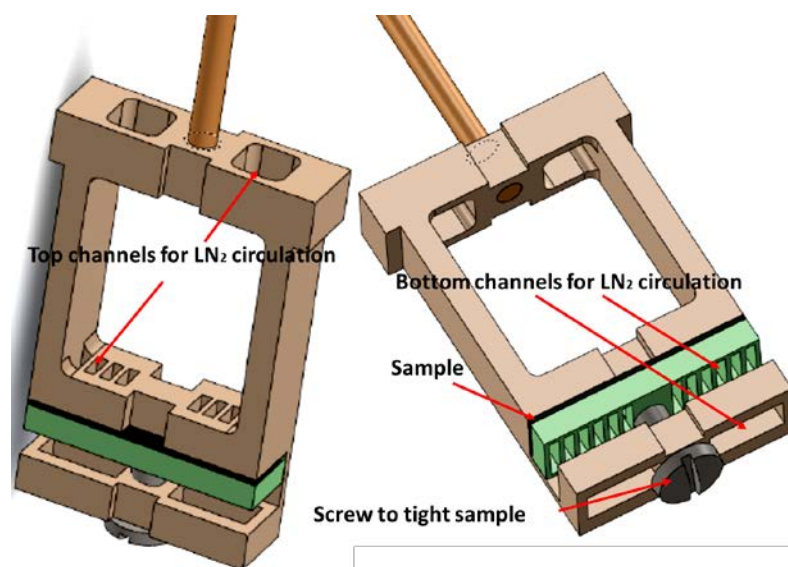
A SolidWorks drawing of the engineered sample holder.
